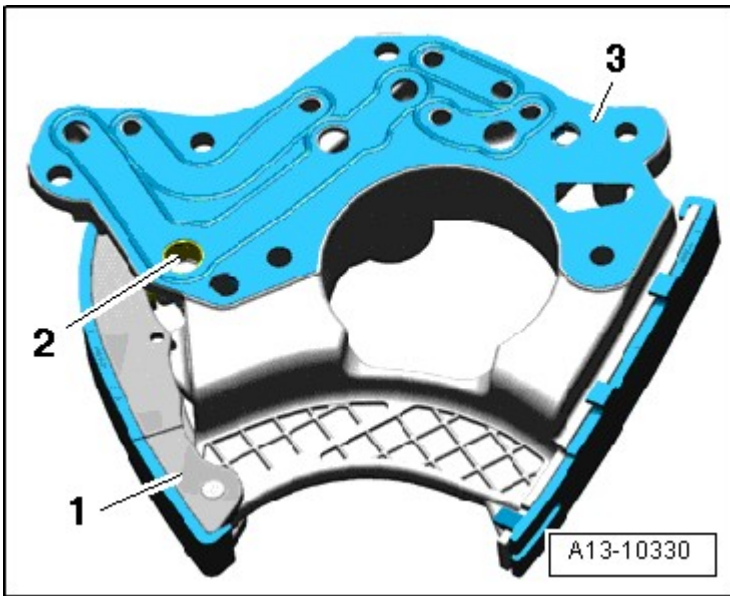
Identifying Chain Tensioner Oil Screen, Gasket & Chain Tensioner
